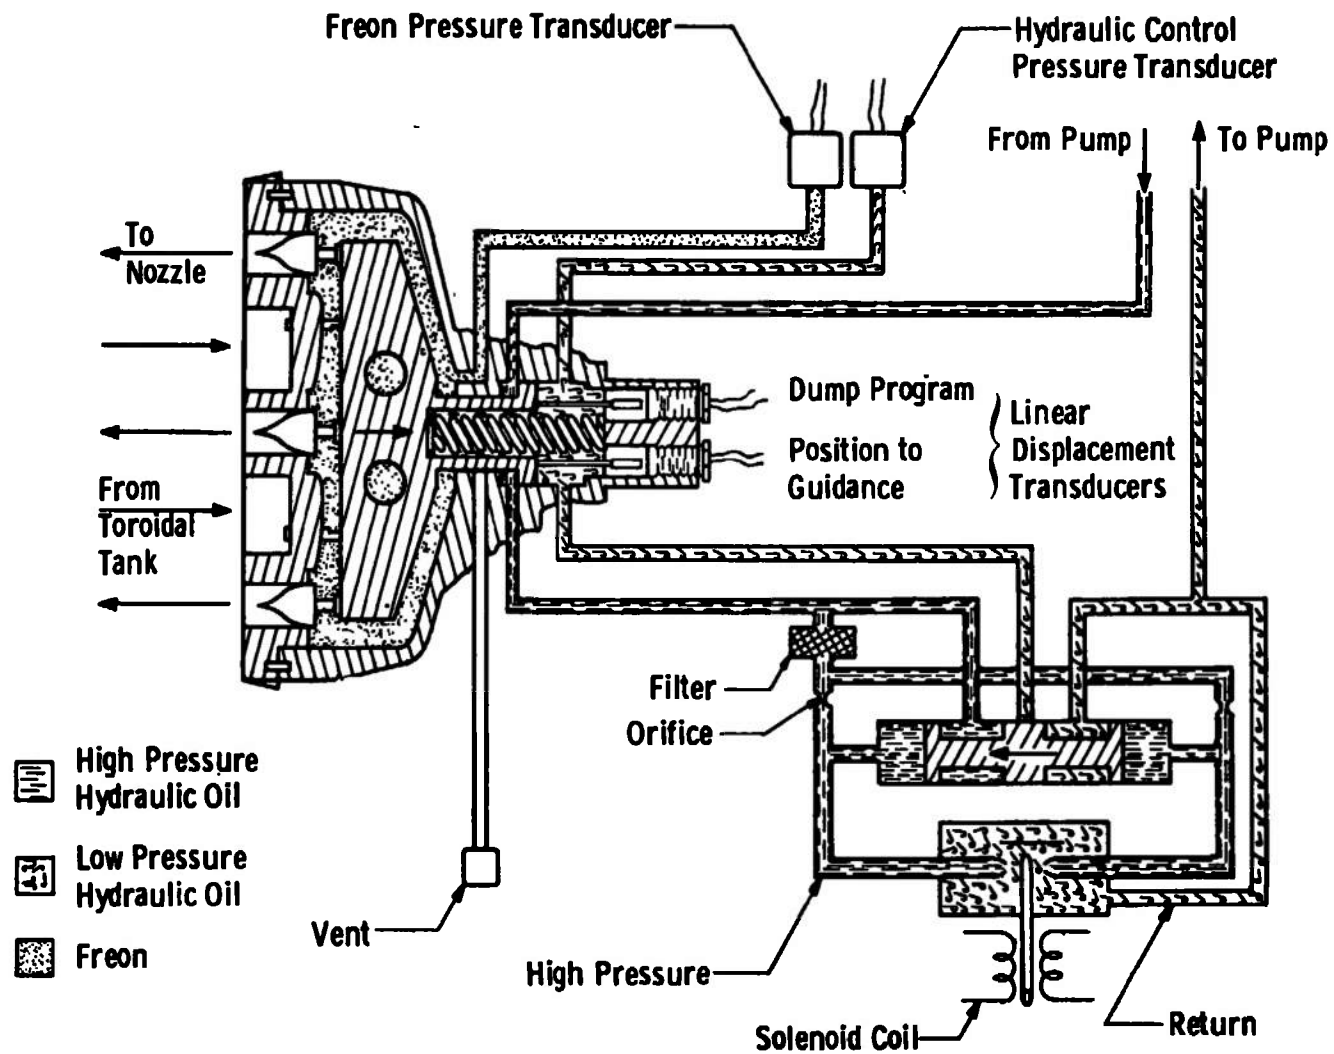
Liquid-Injection Thrust Vector Control Injector Valve
